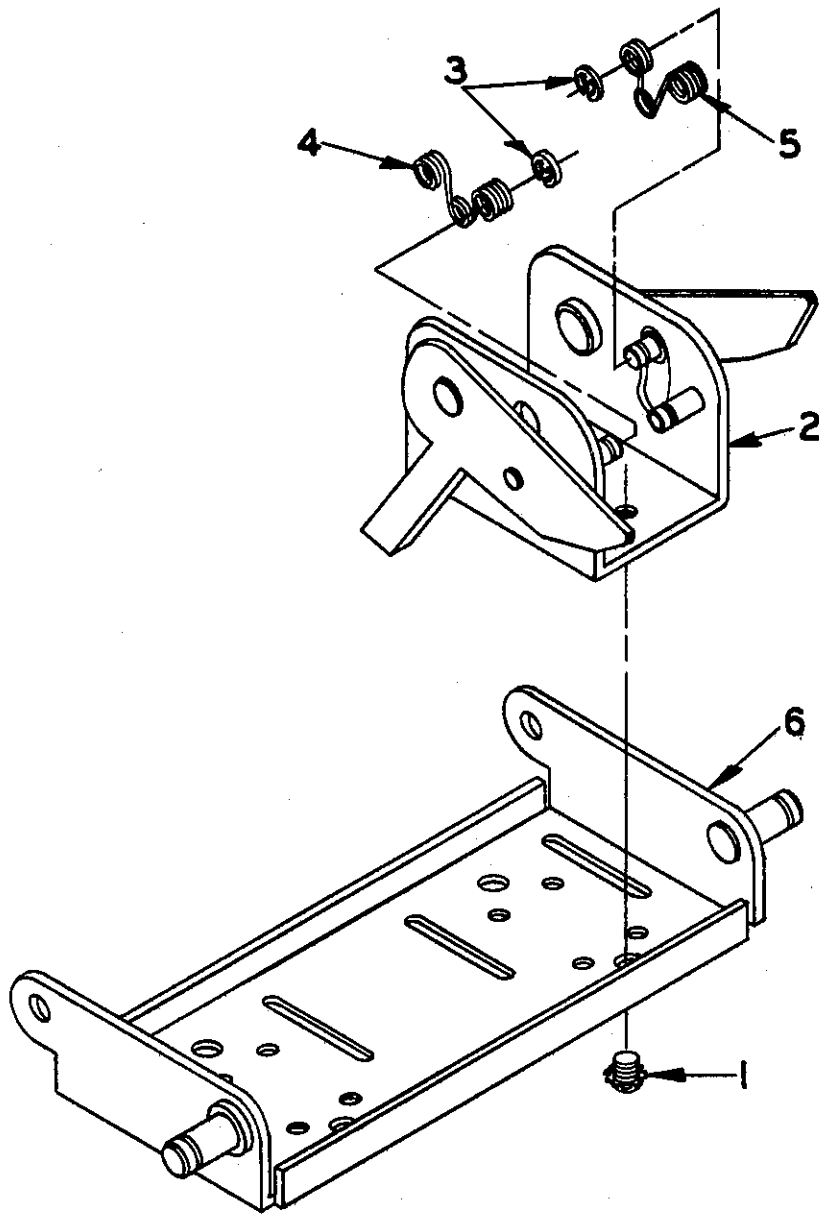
PUSHER AND DRIVE BAR ASSEMBLY
